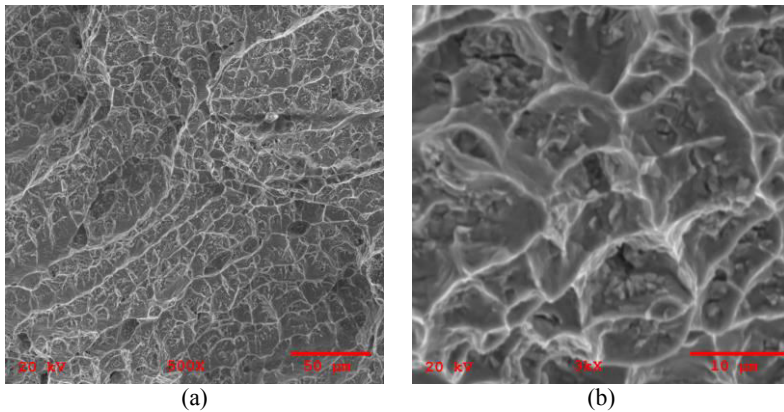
SEM fractographs showing the impact fracture surface of weld metal (a) and several precipitates within the dimples (b).
